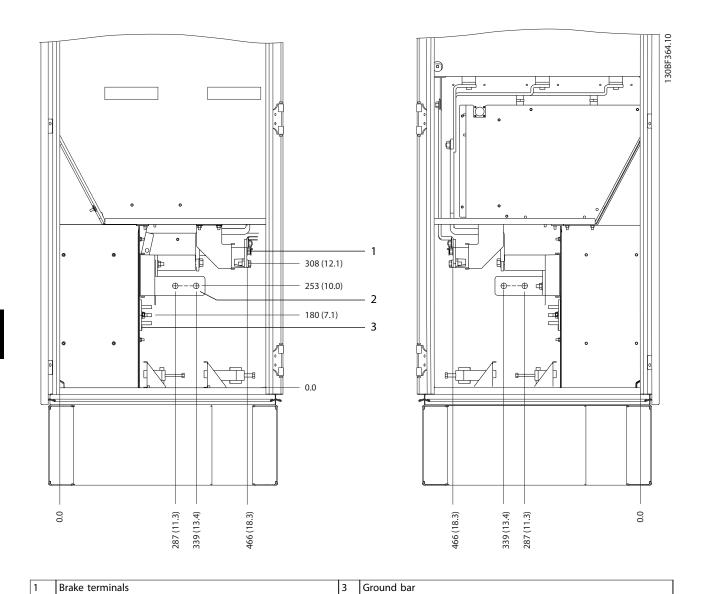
Terminal Dimensions for F2/F4 Inverter Cabinet, Front View
